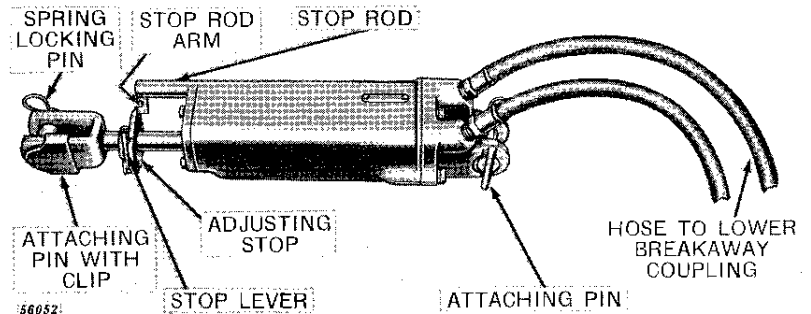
Remote Cylinder Attaching and Adjusting Parts
